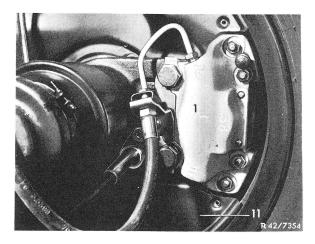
Cover plate version 2 1 Caliper 11 Cover plate
